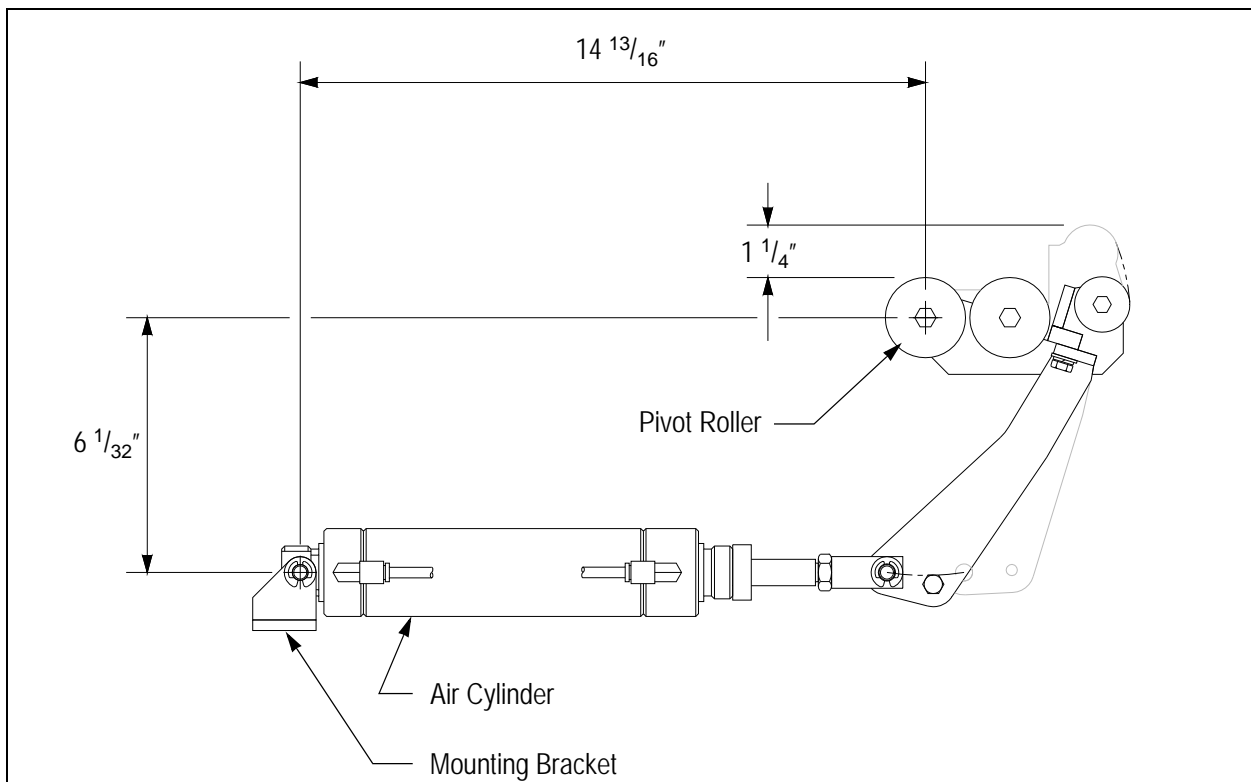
Actuator & Linkage Dimensions – 2" & 4" Roller Centers
